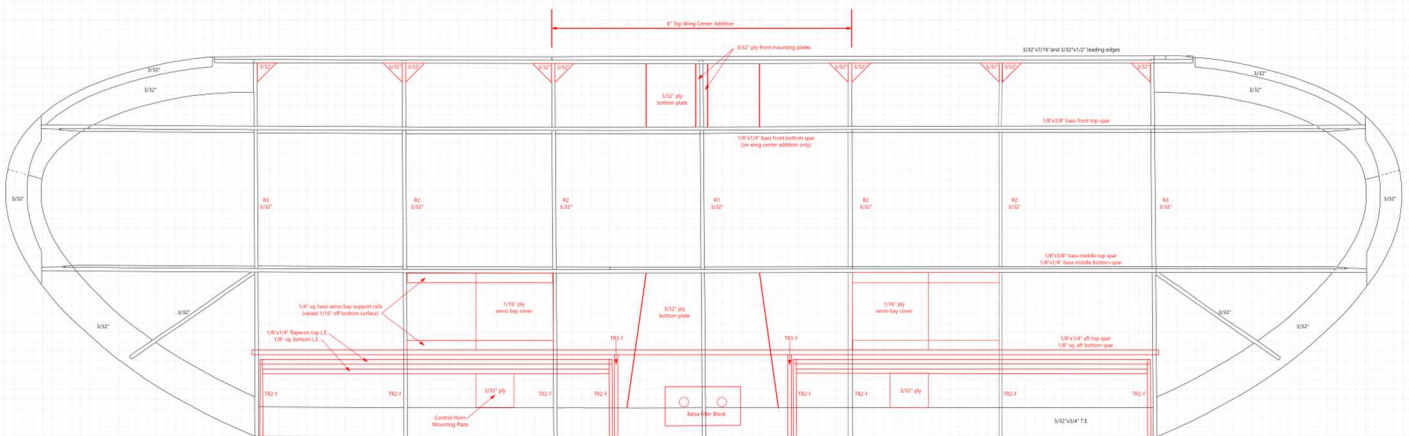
Extended Top Wing Plan with Bolt-On Mount and Flaperon Modifications in Red
